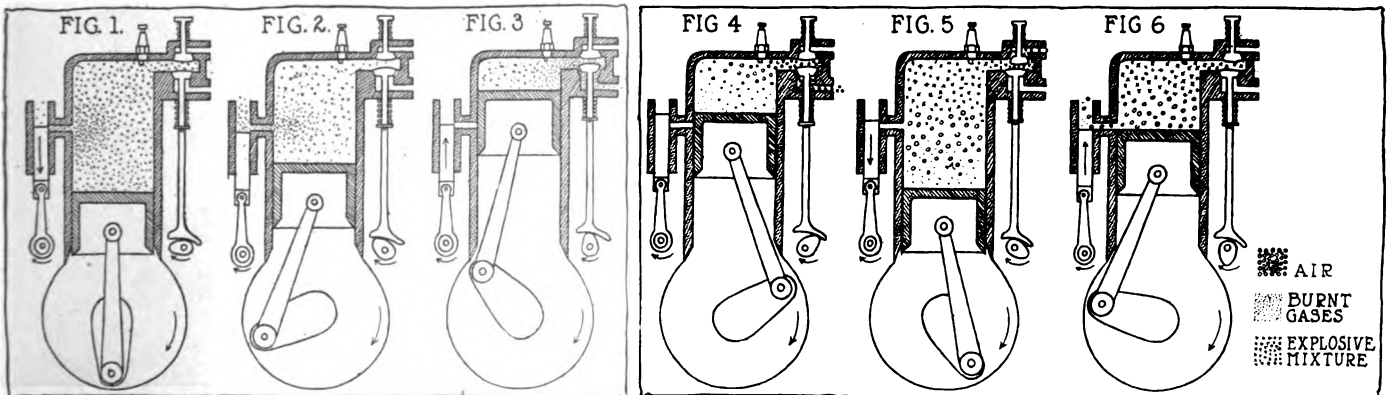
End of explosion stroke. Fig. 2—Beginning of the scavenging stroke. Fig. 3—End of the scavenging stroke. Fig. 4—Start of suction stroke, only air admitted. Fig. 5—Inlet of explosive mixture. Fig. 6—End of stroke with cylinder scavenged
